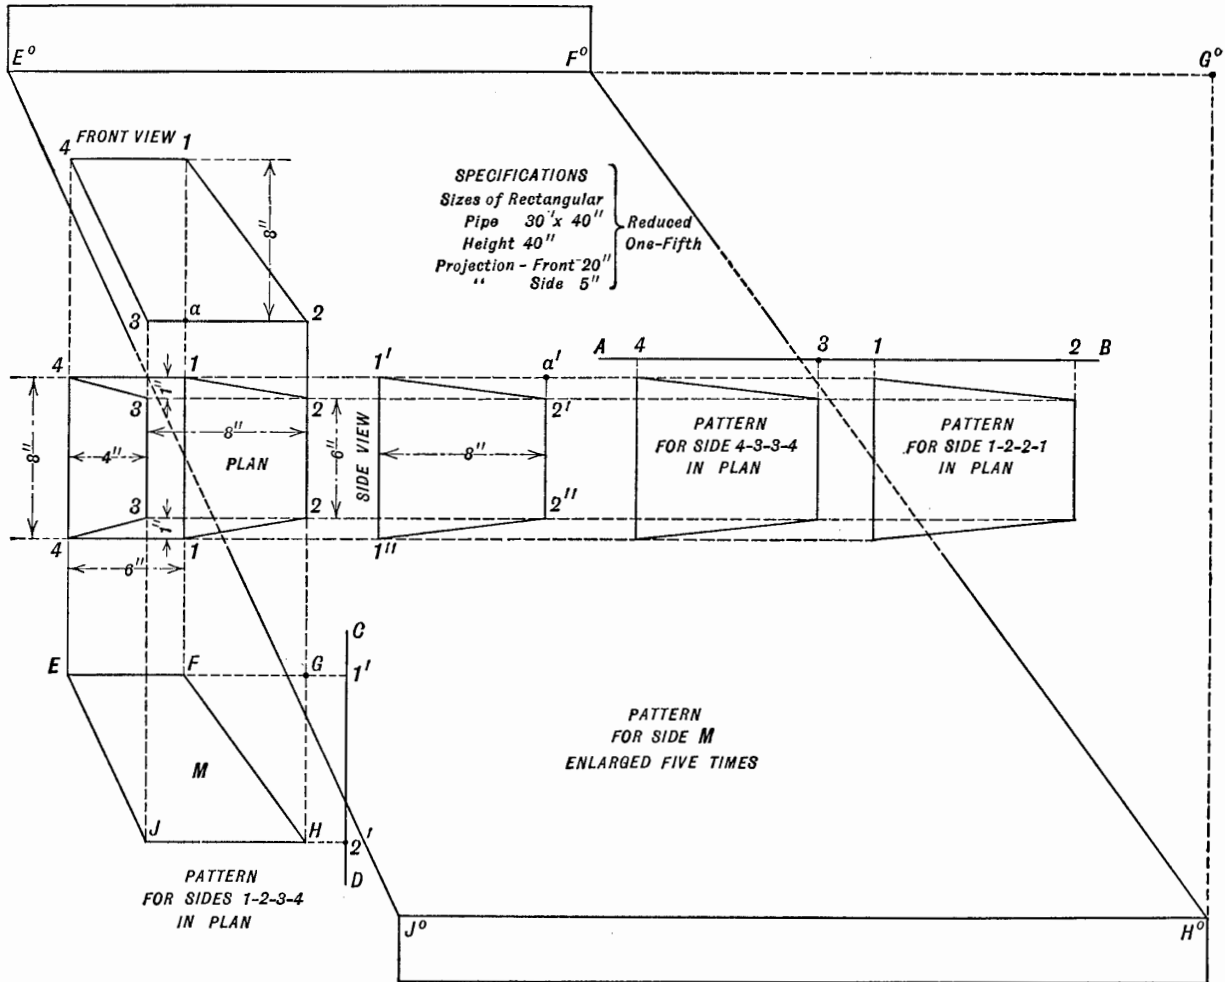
Full Size Patterns for Twisted Offset by Means of Reduced Drawings
